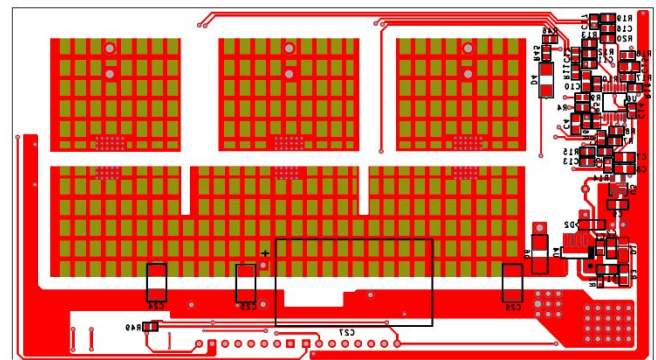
Slotted Linear PCB Configuration Layout (125 mm x 69 mm).
